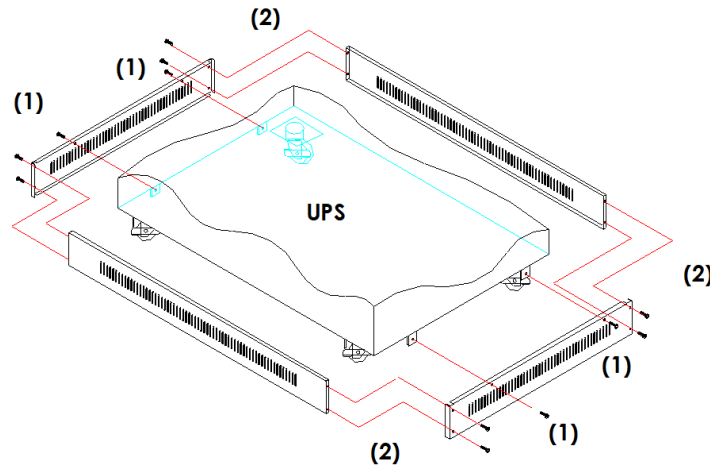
Exploded View of Bottom Skirting Assembly
